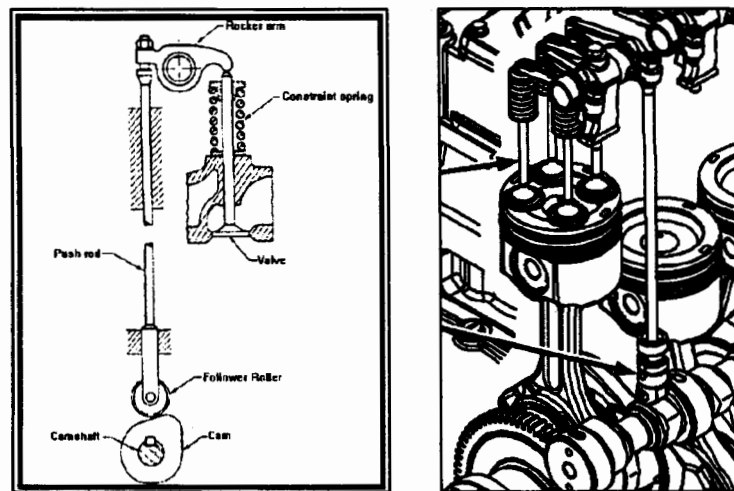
Rocker Arm Assembly. (John Deere Power Tech Plus™ 9.0L Tier 3/Stage IIIA OEM Diesel Engines – Base Engine Technical Manual)
